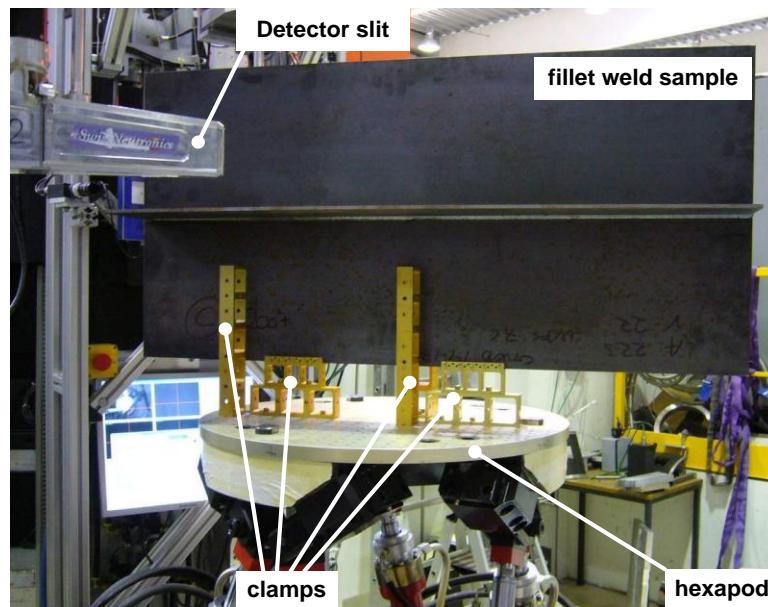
Fillet welded sample clamped onto the hexapod used to manipulate the samples
